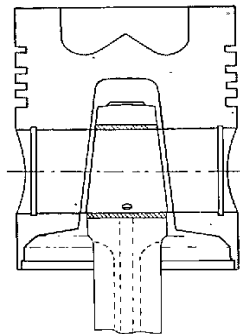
Connecting rod with trapezoidal gudgeon pin end, 70 series.
